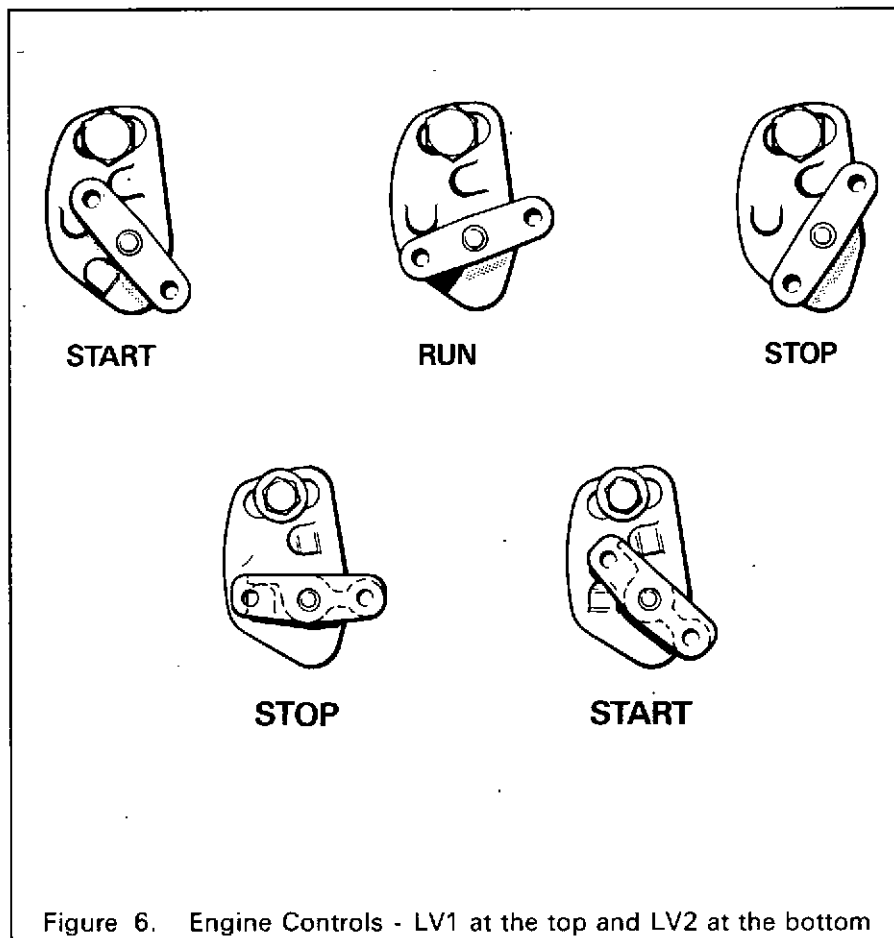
Engine Controls - LV1 at the top and LV2 at the bottom
